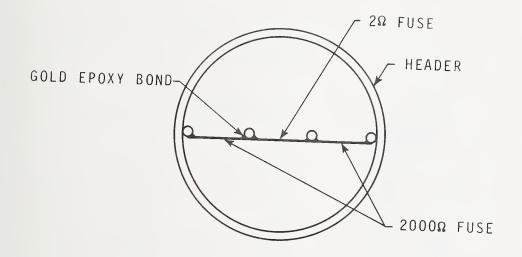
Arrangement of fuses for attachment to pins-header assembly.
